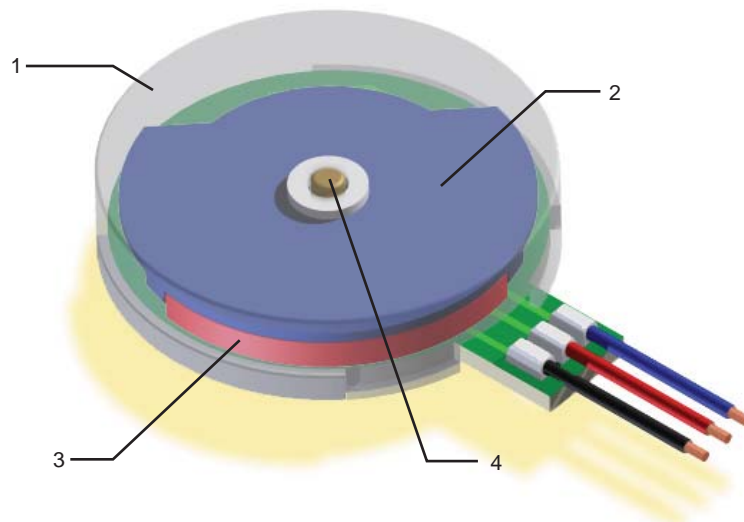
Coin-type vibration motor. A relatively flat eccentric weight spins in a protective enclosure. (1) enclosure, (2) rotor base, (3) weight, (4) shaft.
